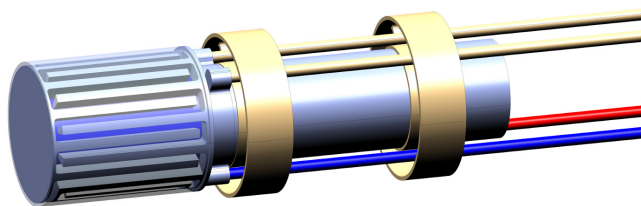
Cold Moderator Vessel with insulating spacer. Helium intake (blue) and outtake (red) at the bottom.
